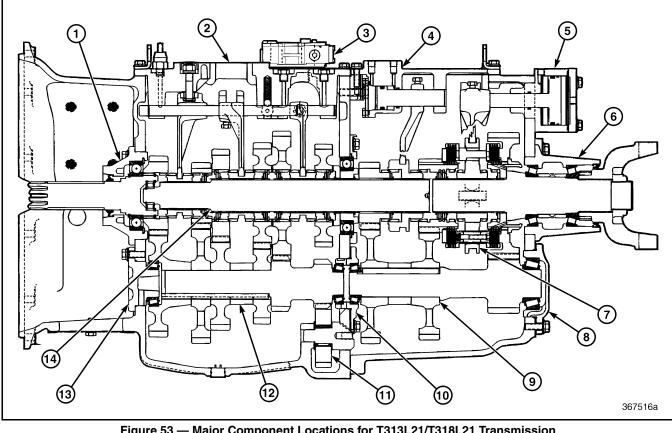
Major Component Locations for T313L21/T318L21 Transmission
